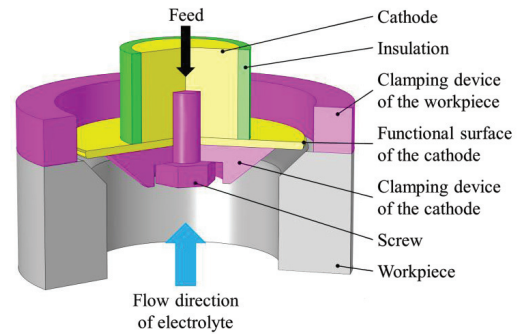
Design concept for machining internal precision geometries with pulsed electrochemical machining [5]
